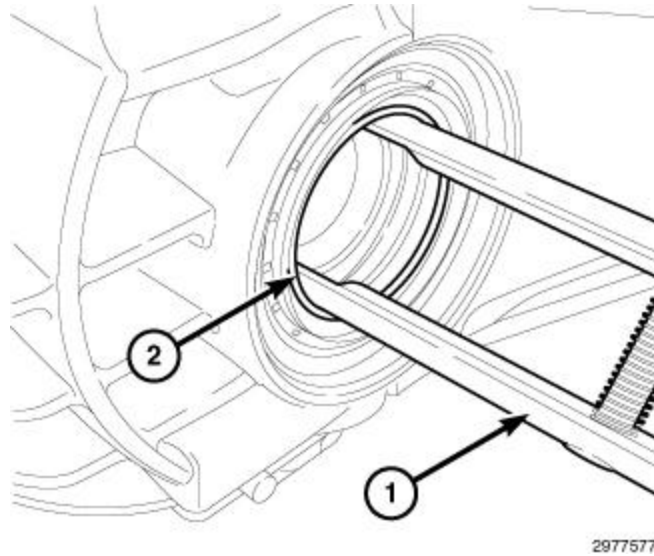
Seal Remover & Axle Shaft Seal (Left)
